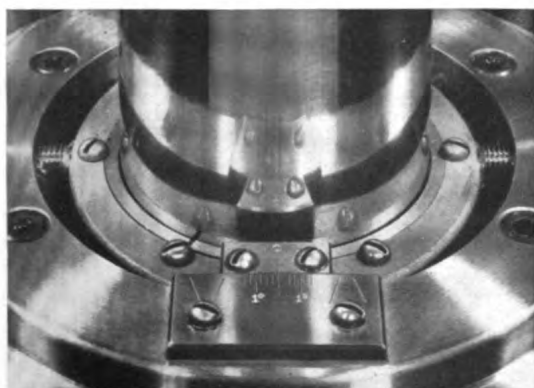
Angle of taper is read directly on the taper-setting plate.
